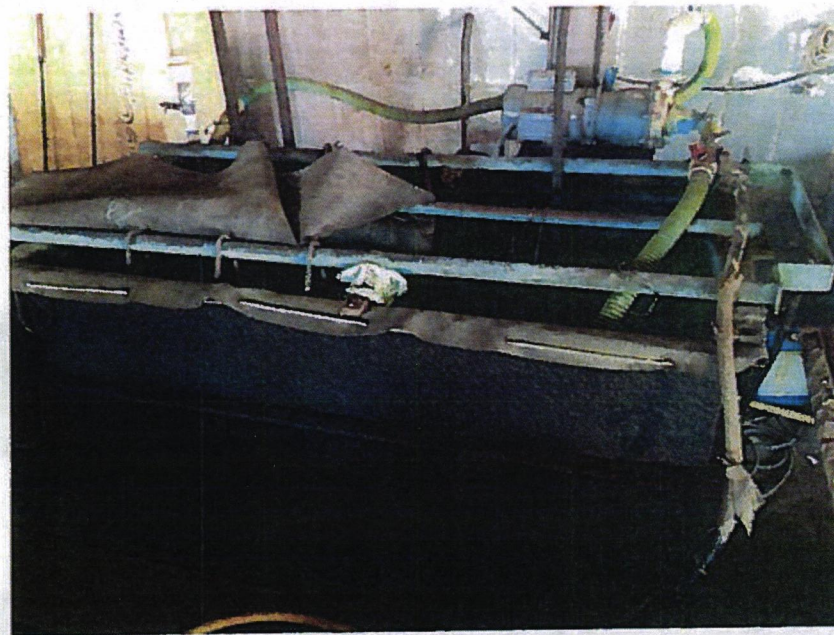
09/06/2016. Plating tank north of the main plating line.
